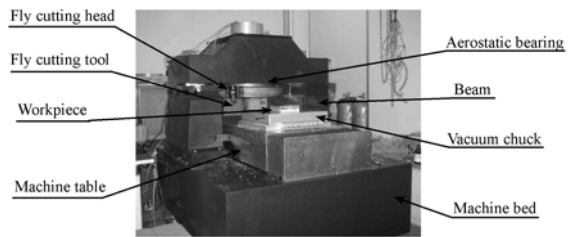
Structure schemes of the ultra-precision fly cutting machine
